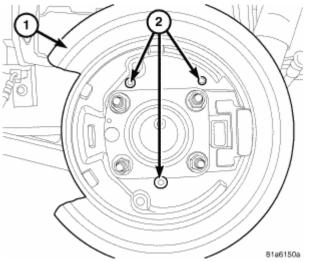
Identifying Support Plate & Attaching Bolts Courtesy of CHRYSLER LLC
